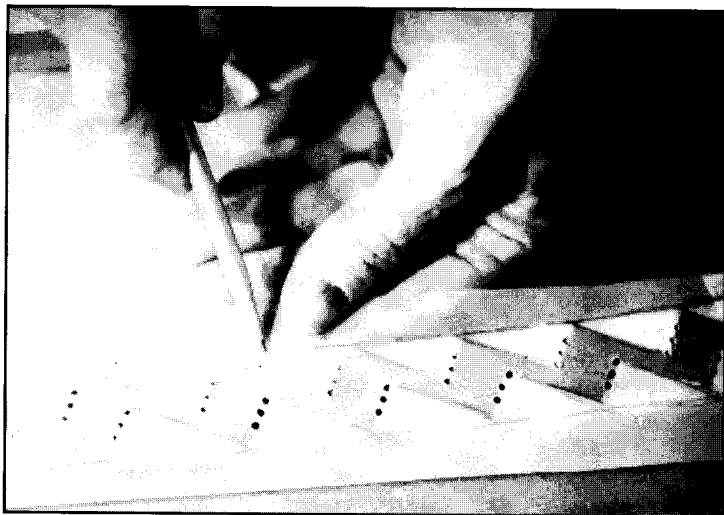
Tracing outline of bridge and notching onto Mylar template.
